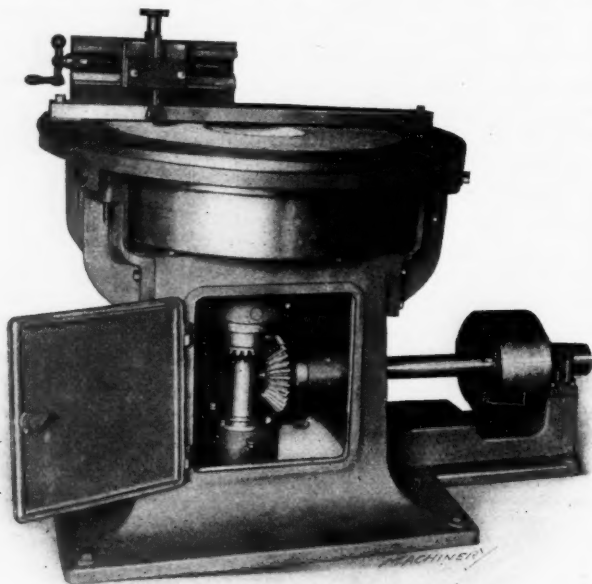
Machine shown in Fig. 1 with Wheel Truing Device in Place on Cross Bar
